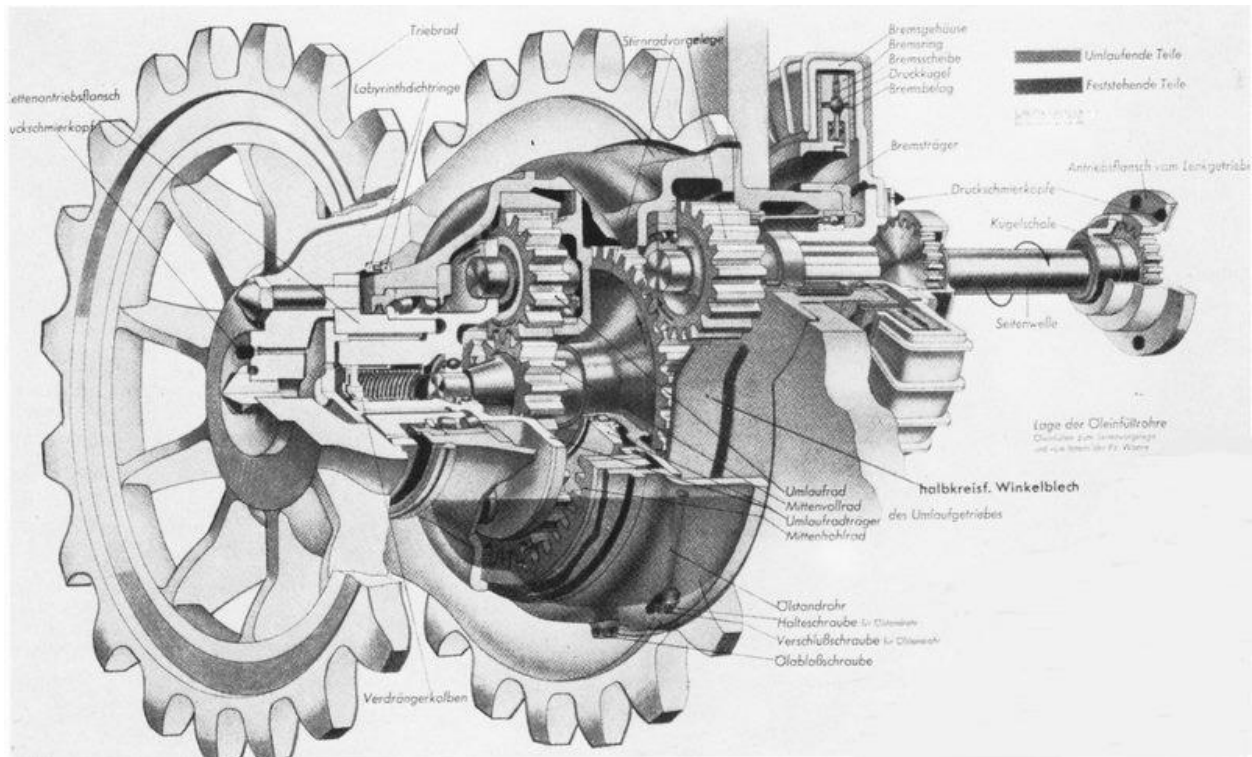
Final drive gears and sprockets (wide track), exploded view.
